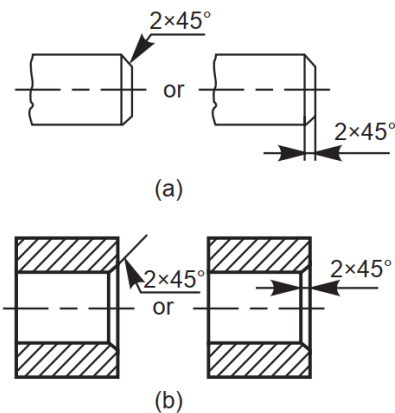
Dimensioning chamfers and Dimensioning counter sinks.
